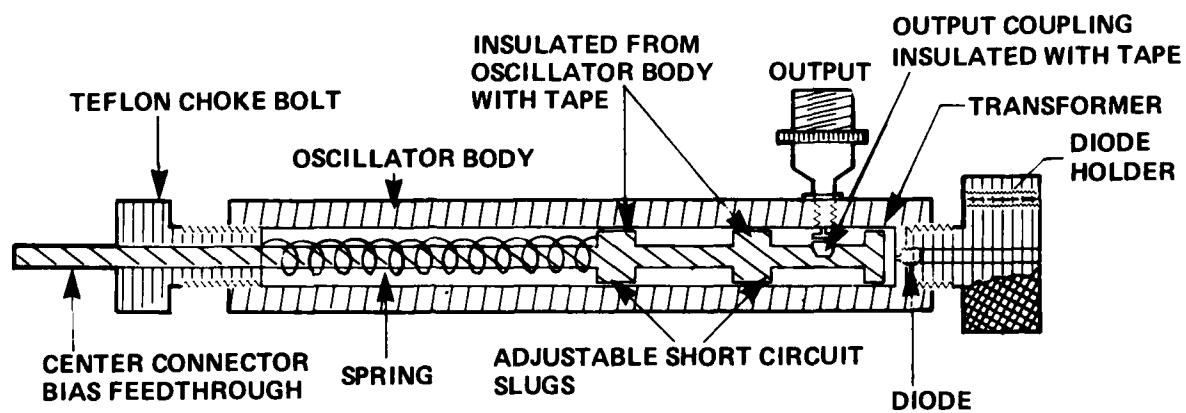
COAXIAL TYPE IMPATT TEST CAVITY USED IN RF BURN-IN APPARATUS
